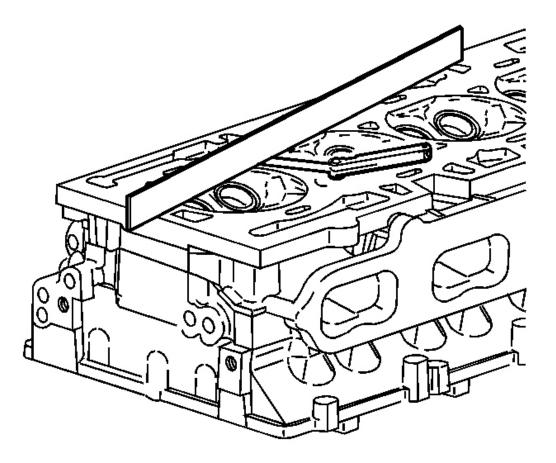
Checking For Cylinder Head Warpage Courtesy of GENERAL MOTORS CORP.
